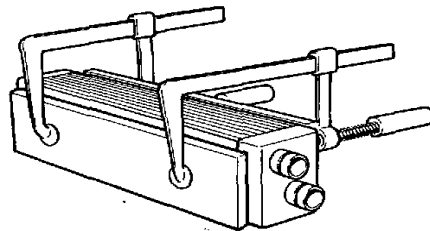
Fitting side supports prior to pressure testing the heat exchanger, TAMD60.
